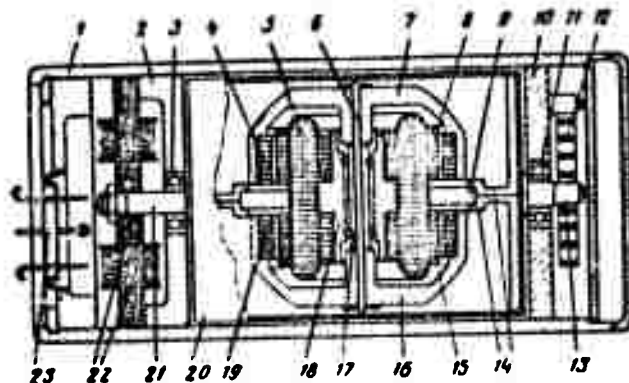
Floating differentiating gyroscope with two-rotor gyromotor: 1) instrument housing; 2) and 10) inner walls of housing; 3) and 11) gyroassembly bearings; 4) and 19) squirrel-cages of rotor; 5) stator winding; 6) rotor axle; 7) and 16) rotors; 8) and 15) laminated stators of gyromotor; 9) disc made in one piece with socket; 18) and 12) spiral spring; 13) and 21) journals of gyroassembly (gyro frame); 14) parts holding gyromotor (disc 9); 17) rotor bearings; 18) socket made in one piece with disc 9; 20) cylindrical shell; 22) pickoff; 23) block with pins.
